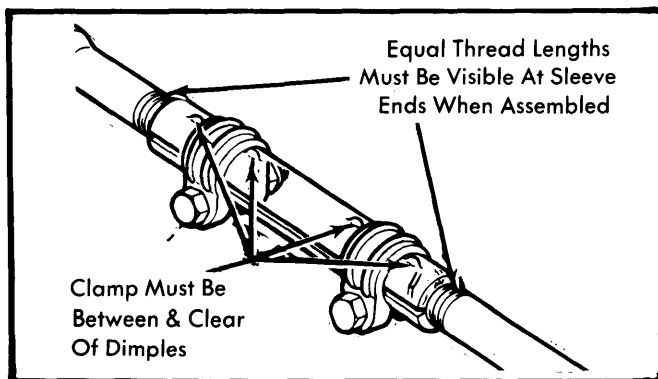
Tie Rod Clamps Between Dimples (General Motors Shown).
